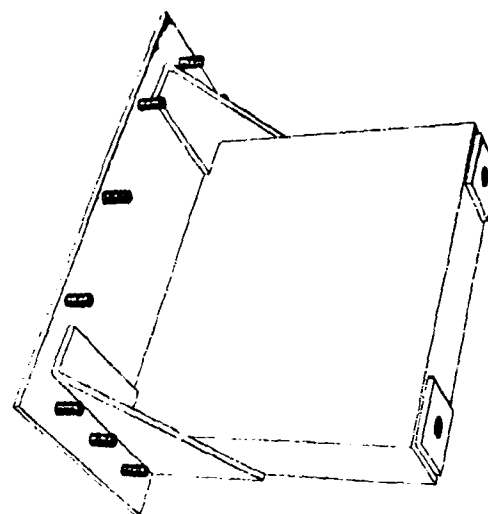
Good chassis construction, showing front panel thumbscrews and hole-plate reinforcement for dowel pins in the rear
